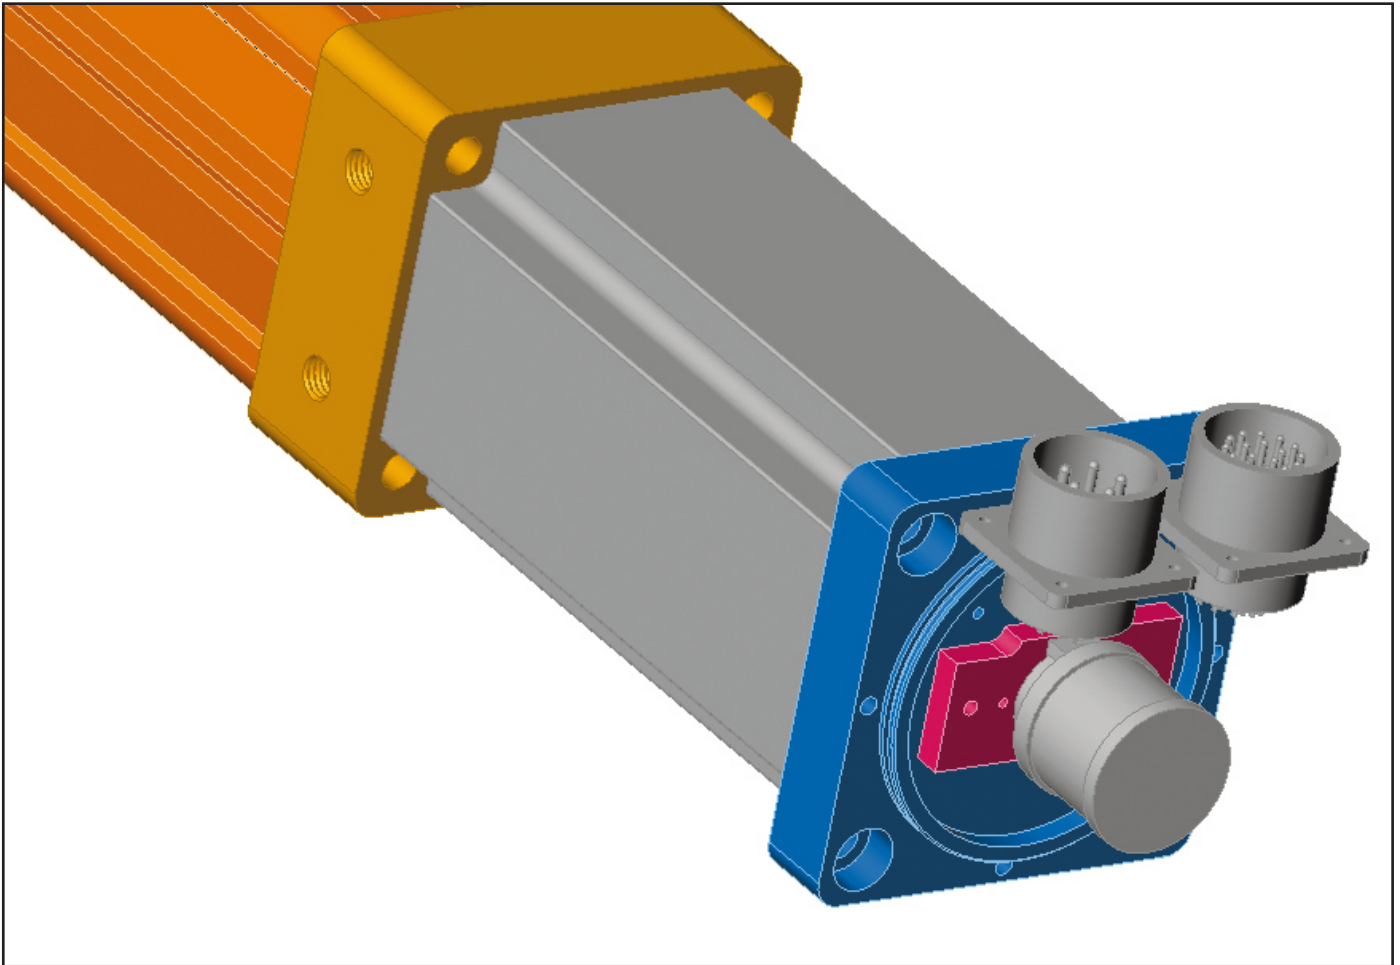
Nachi feedback on welding actuator, with rods and cover hidden to reveal internal components.
